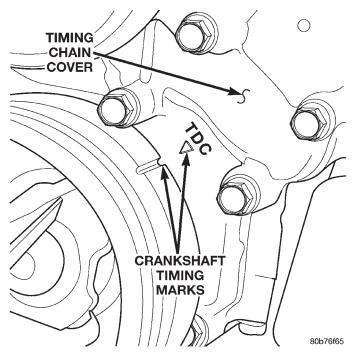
Engine Top Dead Center (TDC) Indicator Mark
